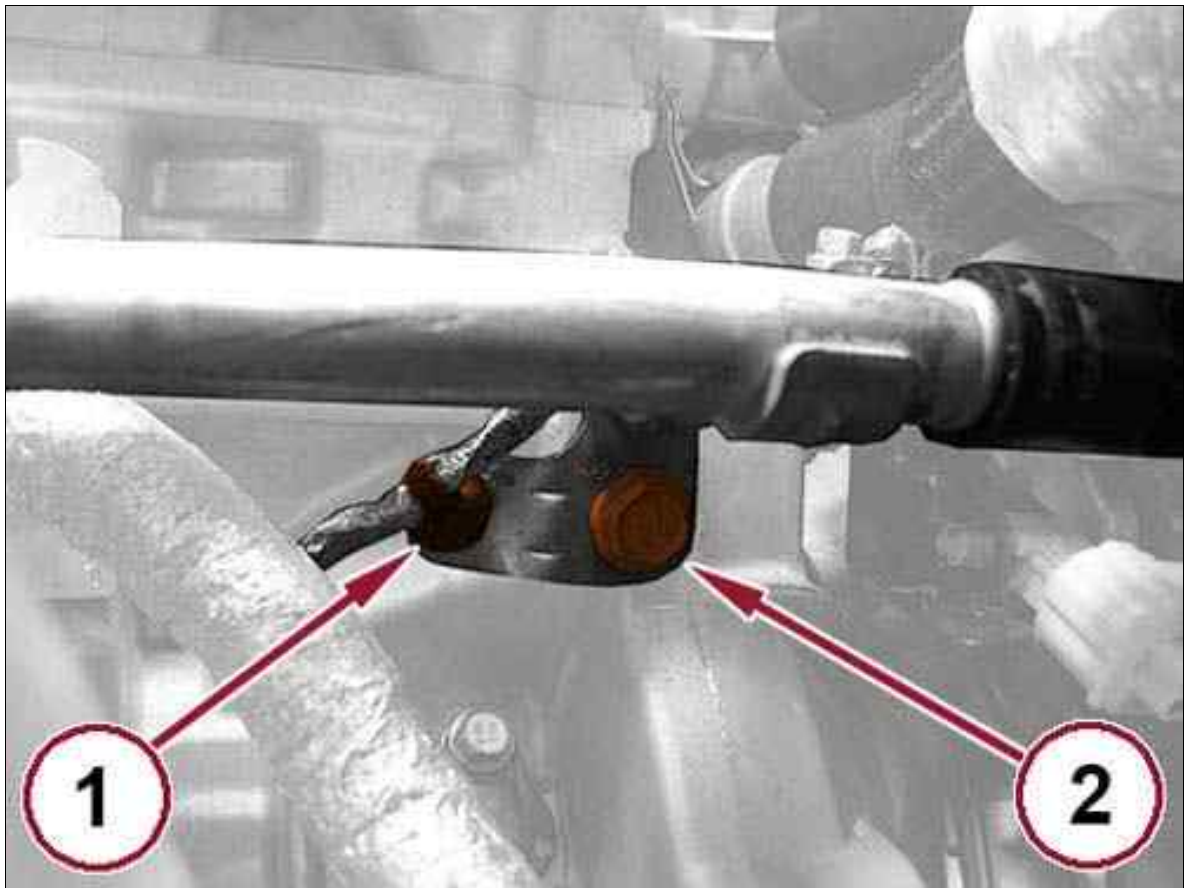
Bottom Exhaust Manifold Heat Shield & Nuts
